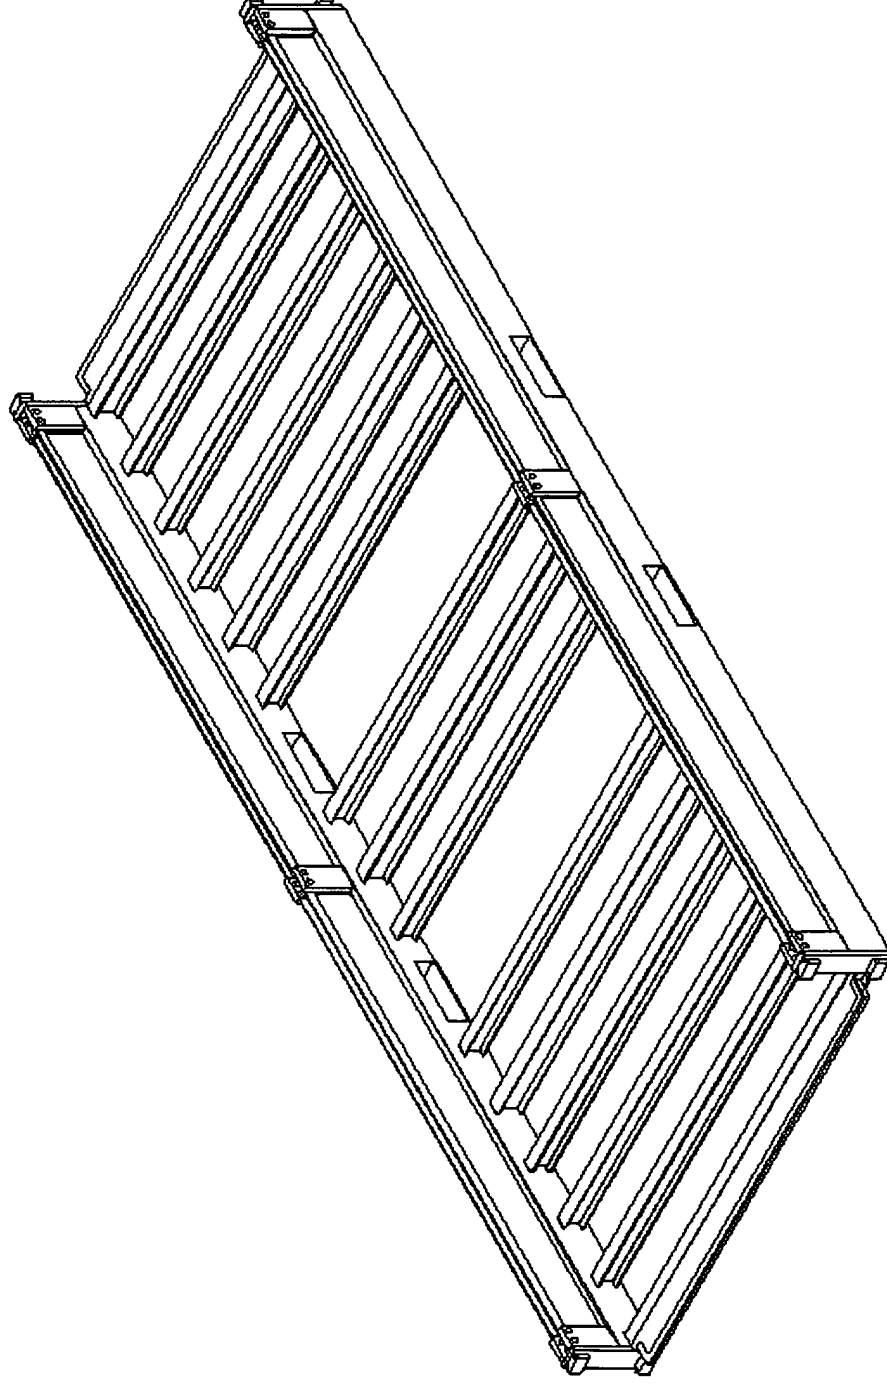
D: Basic isometric view of the floor frame (20 foot high cube collapsible cargo container)
